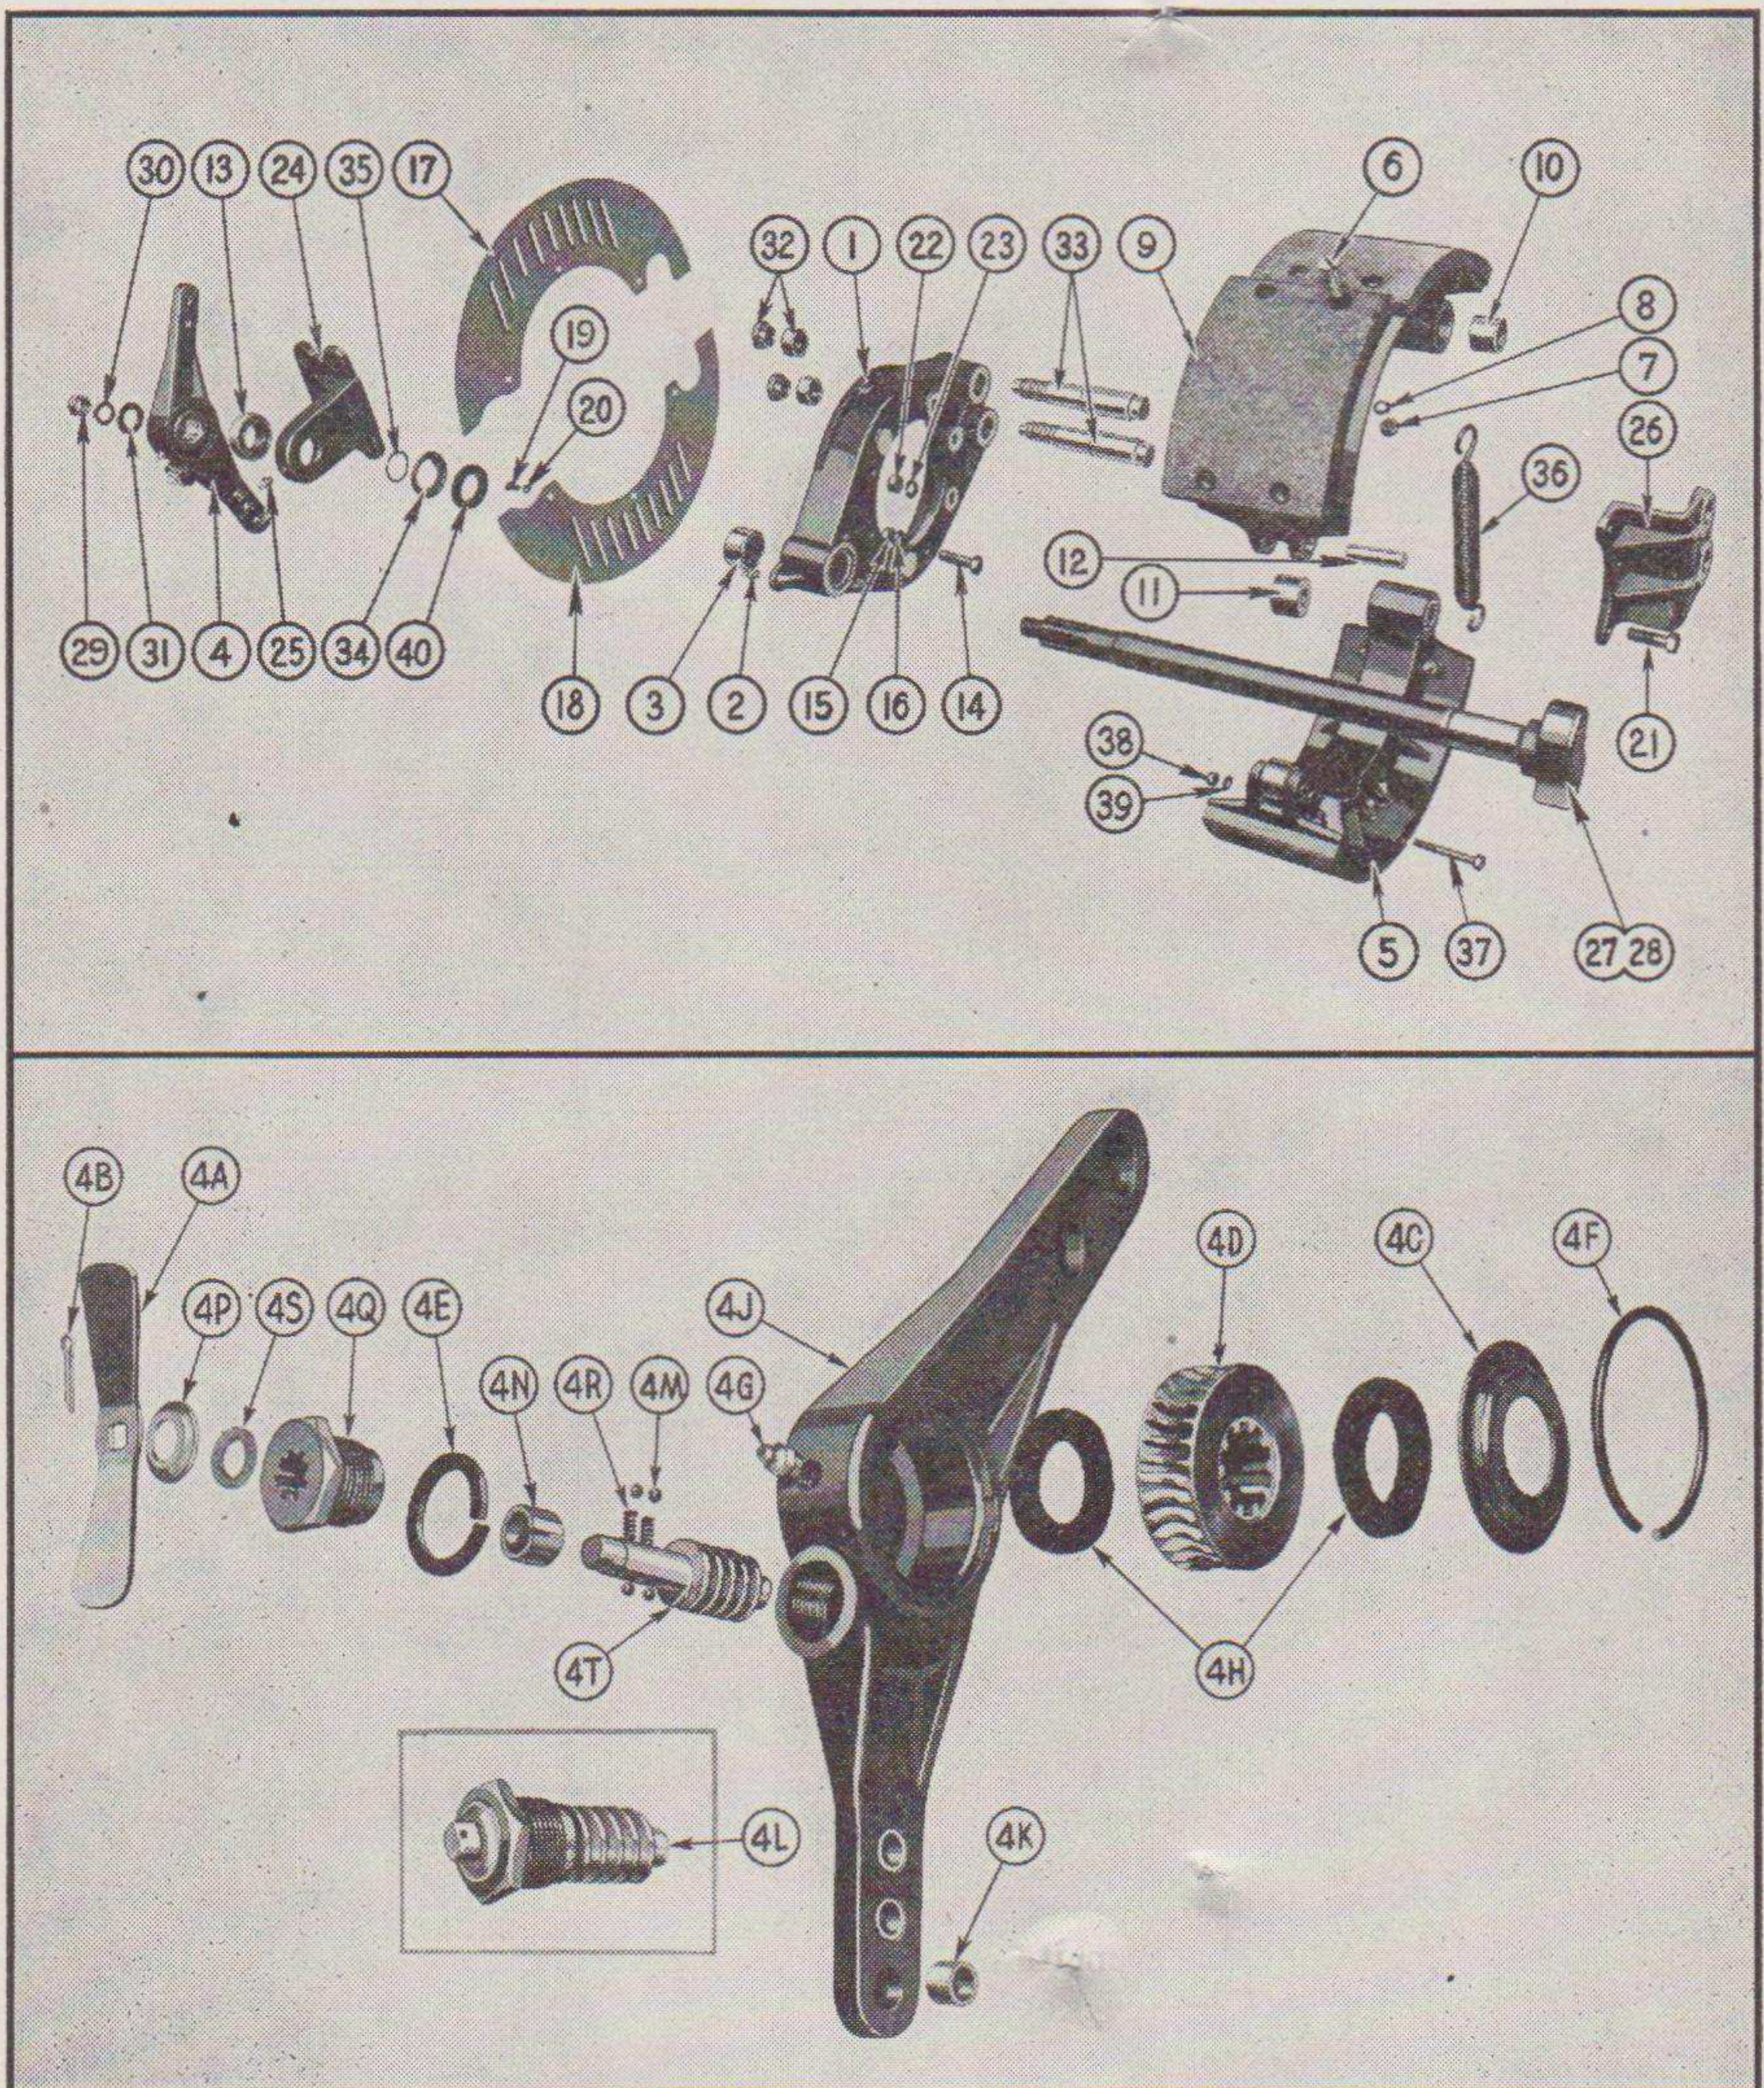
HAND PARKING BRAKE ASSEMBLY
